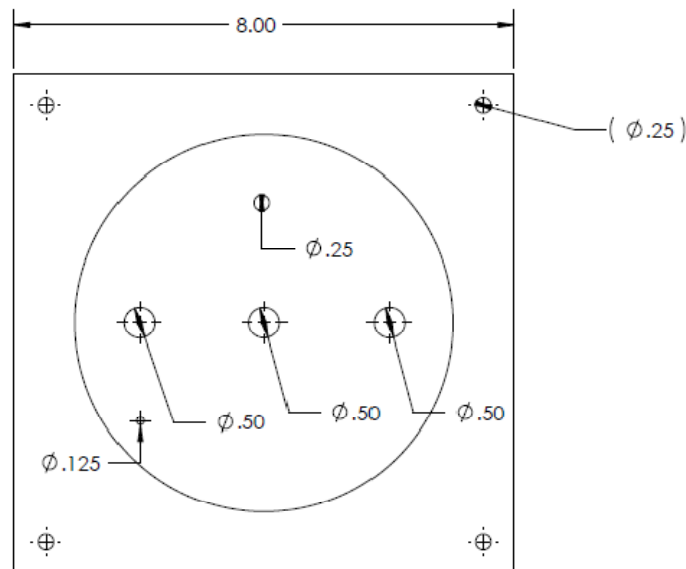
Drawing for the head plate component showing the holes allowing connections for the influent and effluent tube, reactor temperature probe, aeration and sparging tube.
